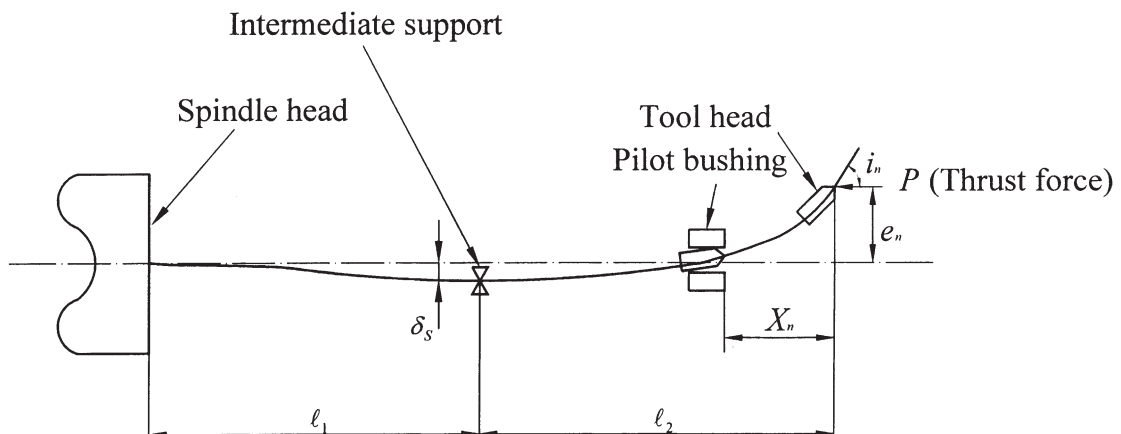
Drill shaft support misalignment in deep-hole drilling.
